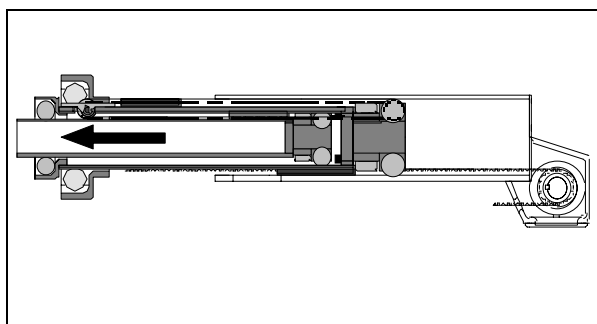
Remove toothed belt sealing piece and mechanical limit stop (Pos. No. for HTR80)
